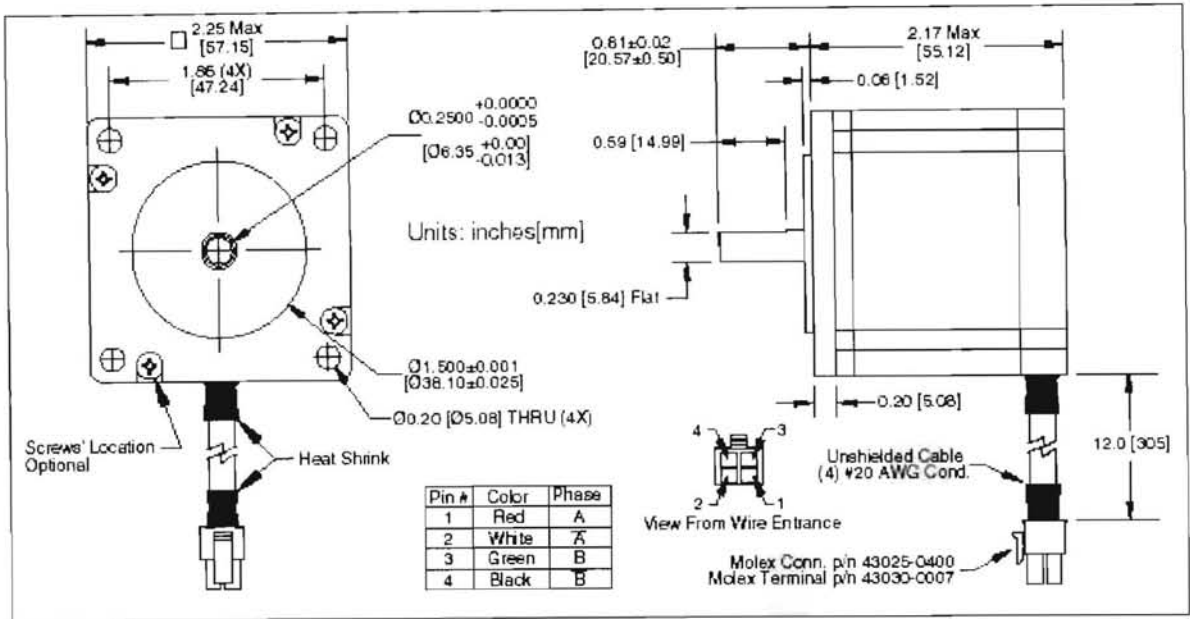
STP-MTR-23055 Motor Dimensions (image courtesy of
